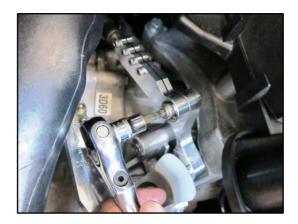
Once the Socket Is In Place, Tighten the Allen Screw with a 6mm Allen Socket
